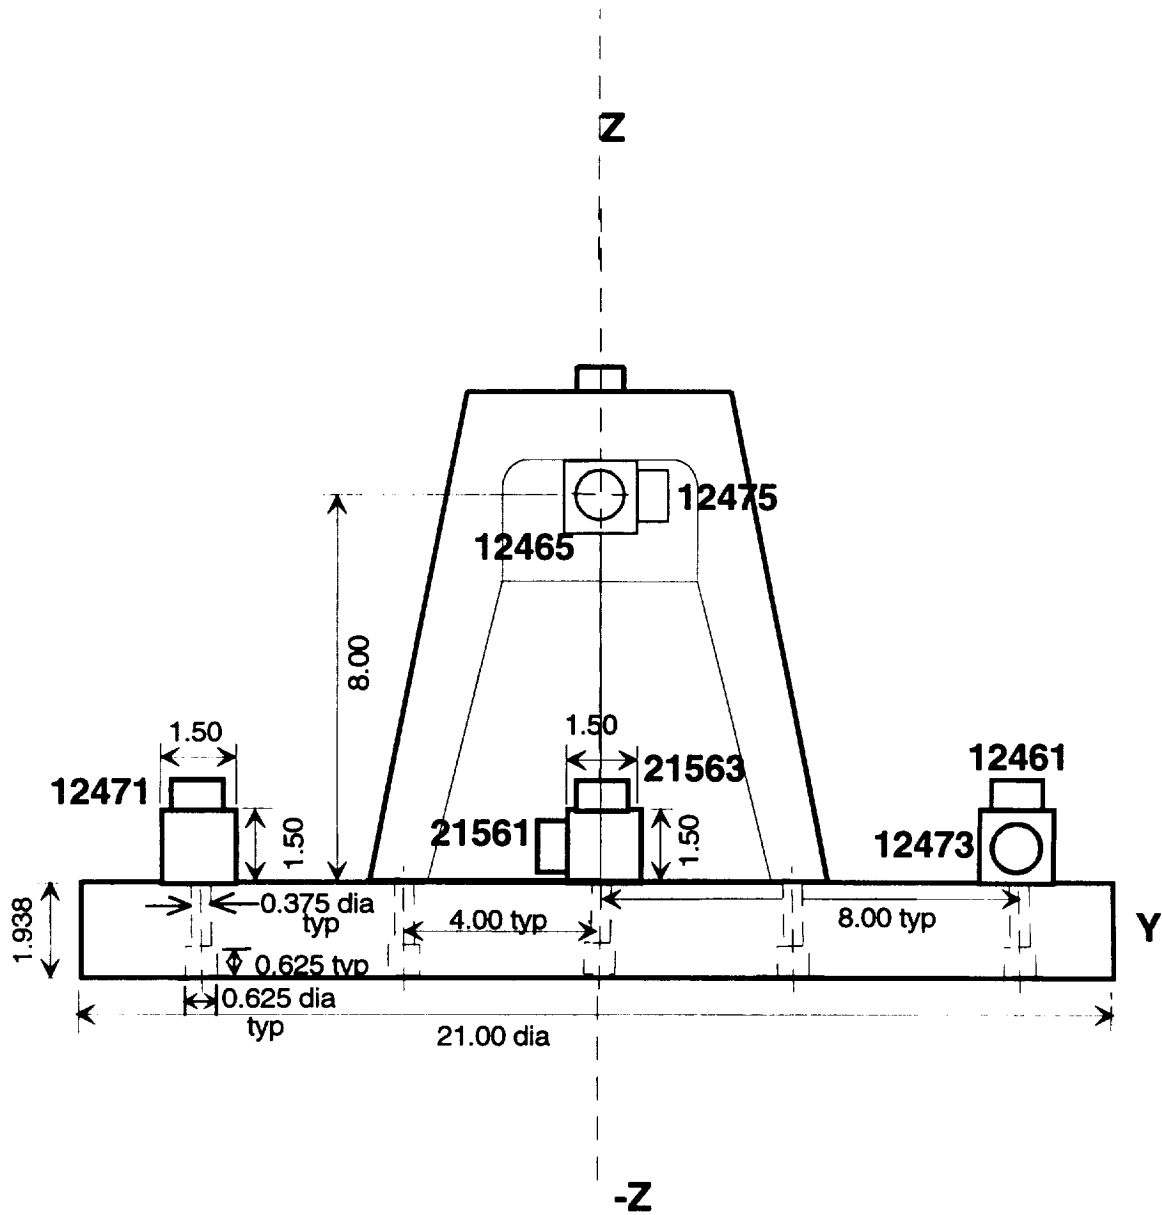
Detailed Drawing of Test Apparatus Platform with Accelerometers
